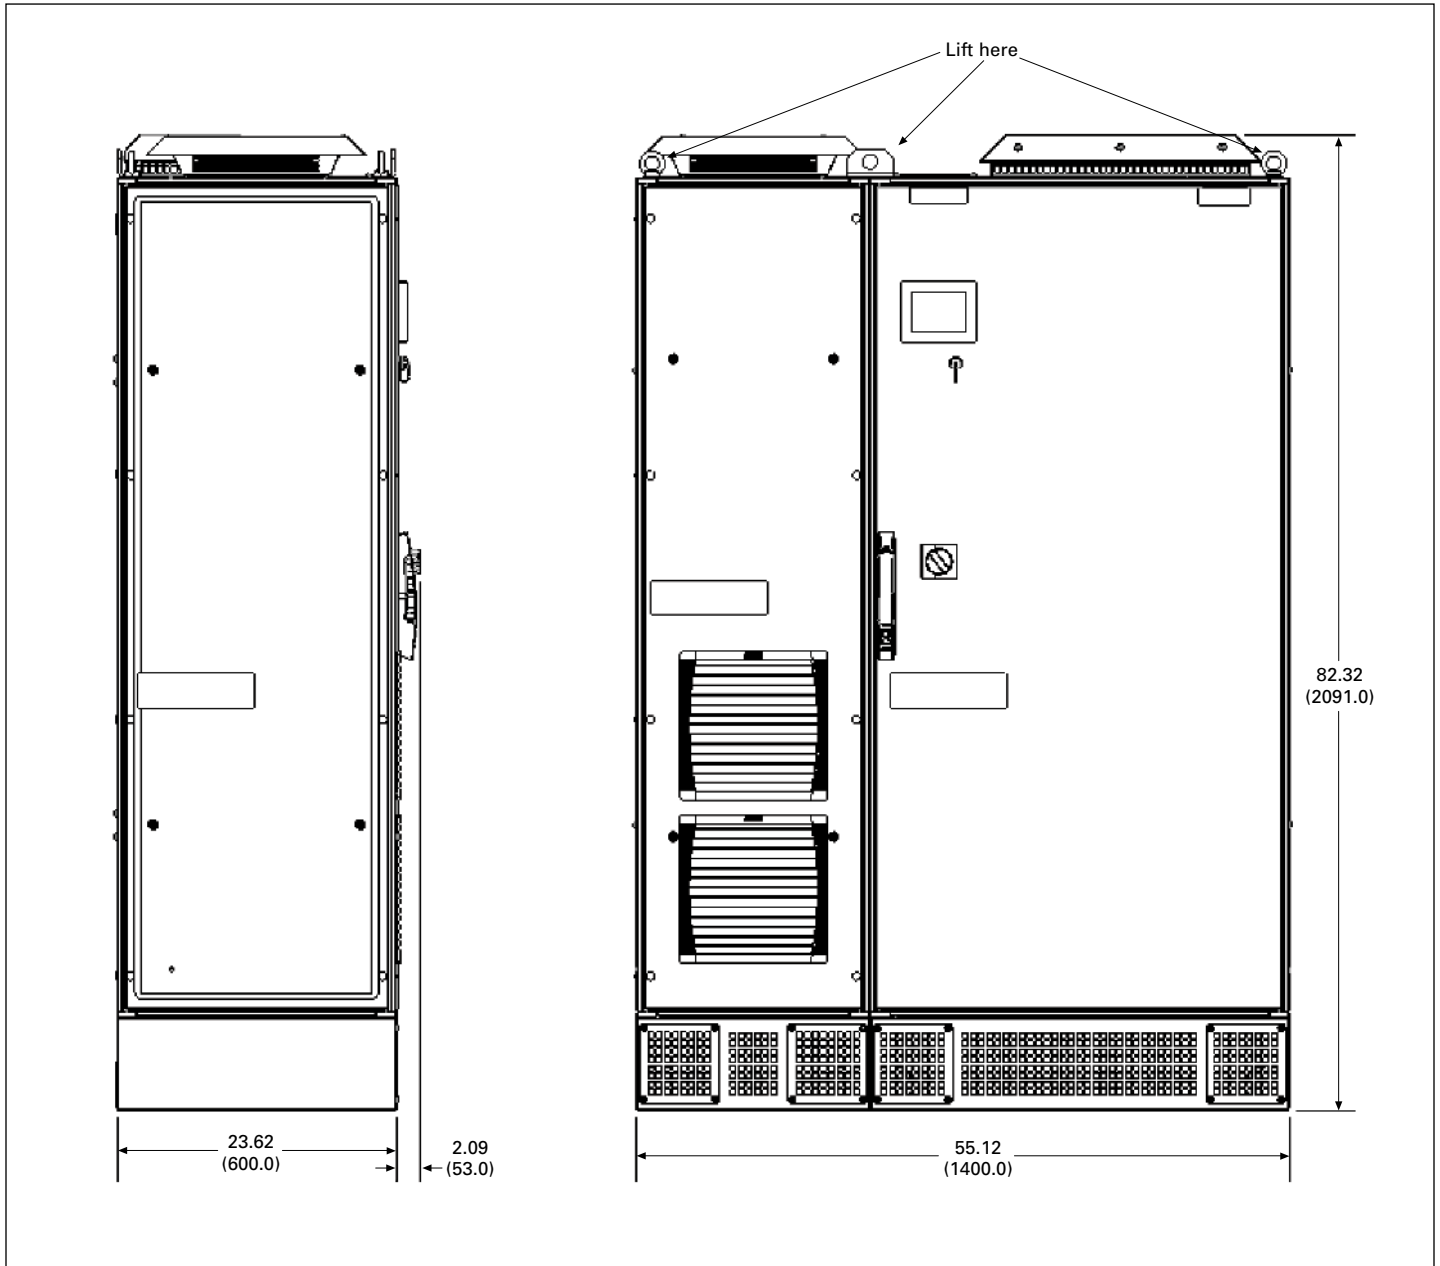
600 V and 690 V units, 133-235 A—dimensions in inches (mm)
